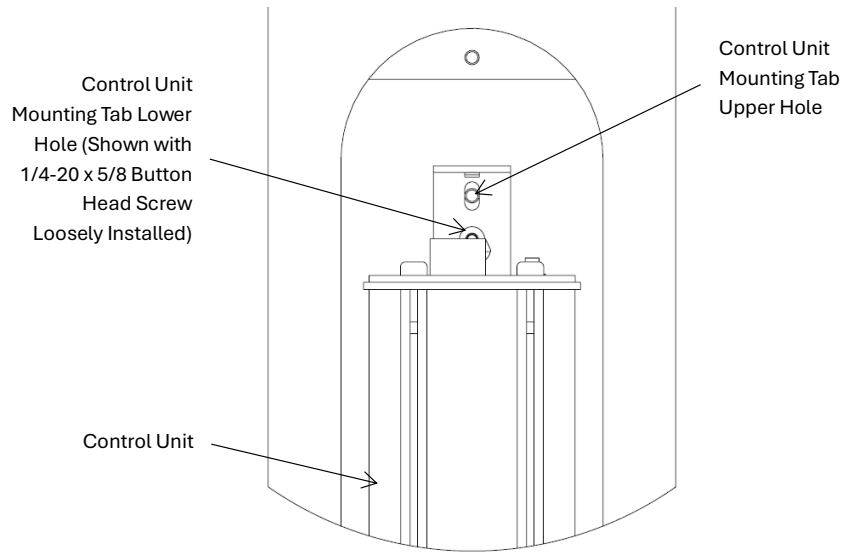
Loosely Install Control Unit Mounting Screw
